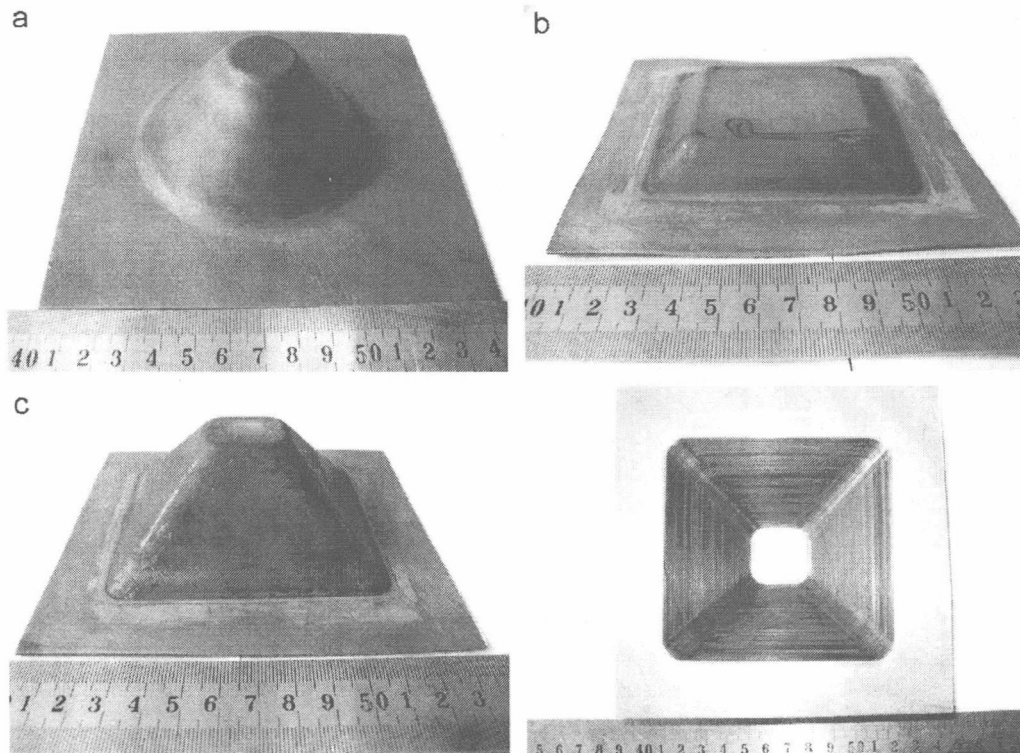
$\text{TiAl}_2\text{Mn}_{1.5}$ workpieces: (a) a cone, current: 400 A; feed rate: 800 mm/min; step size: 0.1; tool diameter: 8 mm. (b) A distorted tetragonal pyramid, current: 400 A; feed rate: 800 mm/min; step size: 0.2; tool diameter: 12 mm. (c) A well-formed tetragonal pyramid, current: 400 A; feed rate: 400 mm/min; step size: 0.1; tool diameter: 8 mm.
